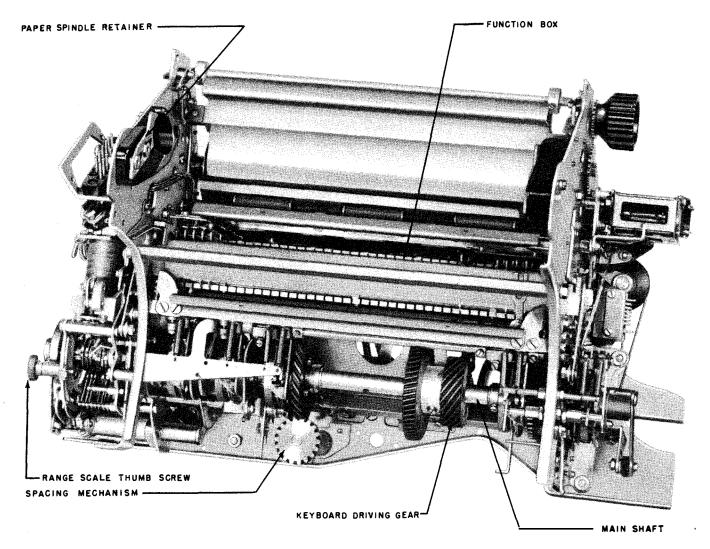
Automatic Typer MX-1115/UG, Rear View
